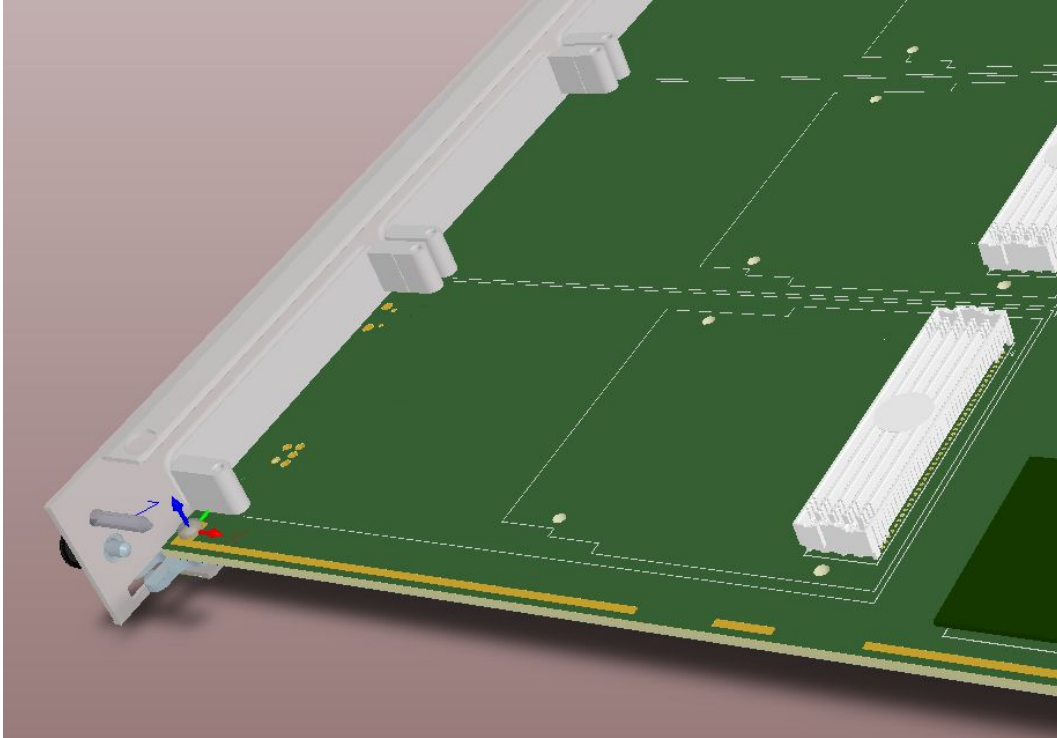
The Data Formatter board detail showing the mezzanine card FMC connector, bezel and front panel.
